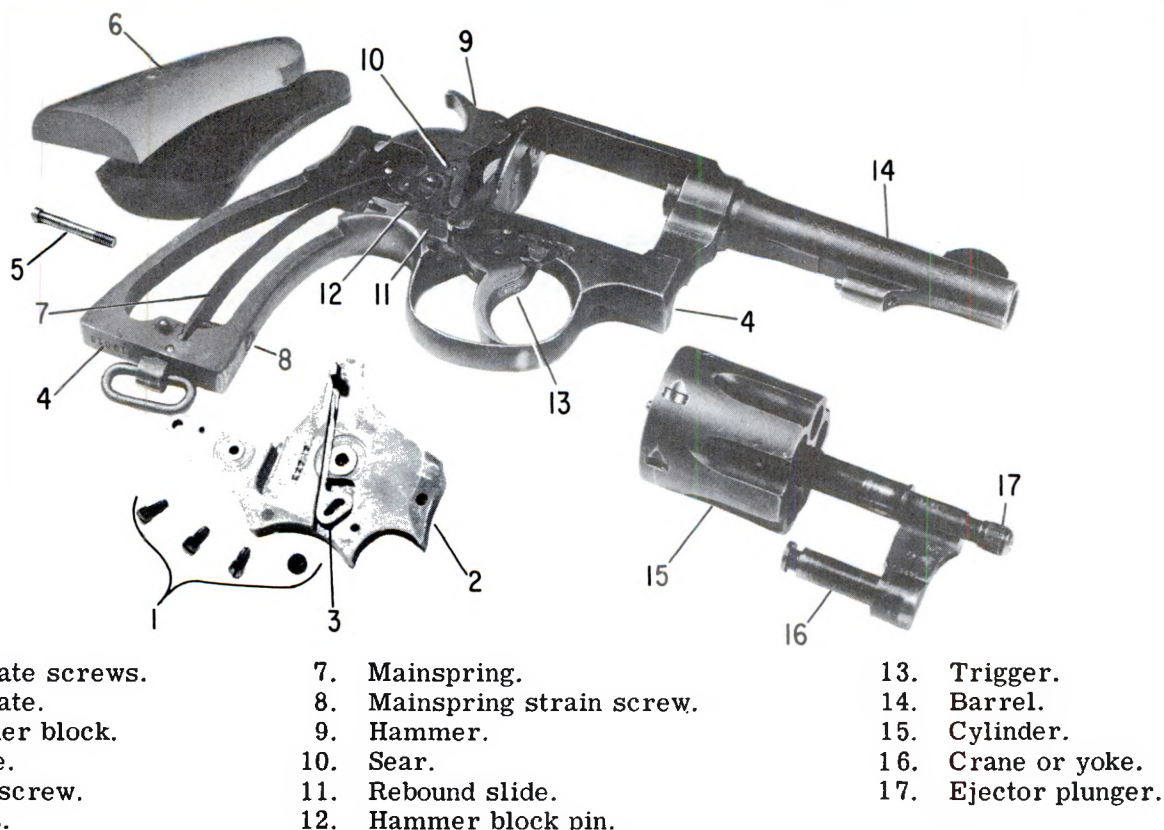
Revolver, Smith and Wesson Caliber .38; right-side view with cylinder and ejector group, sideplate, and stocks removed.
